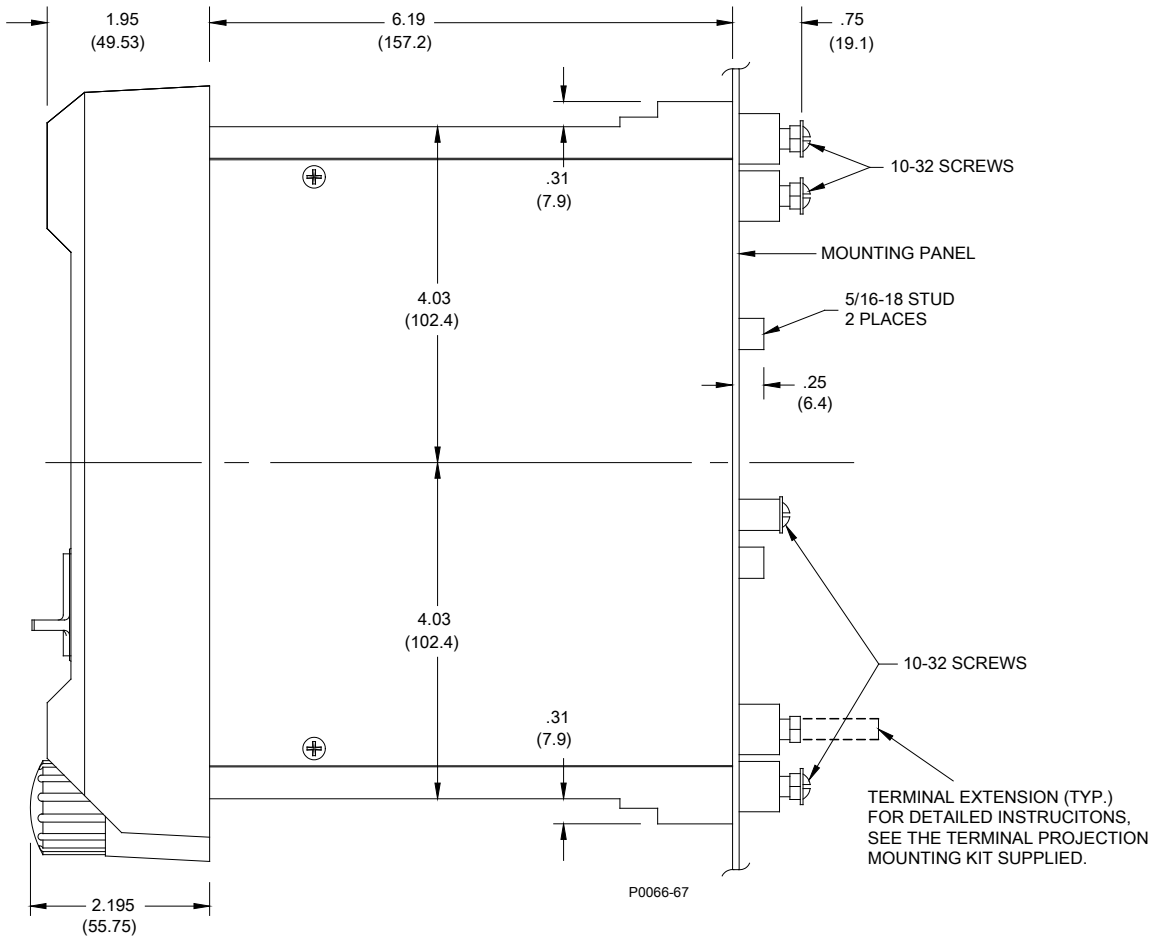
S1 Case Dimensions, Side View, Double Ended, Projection Mount
